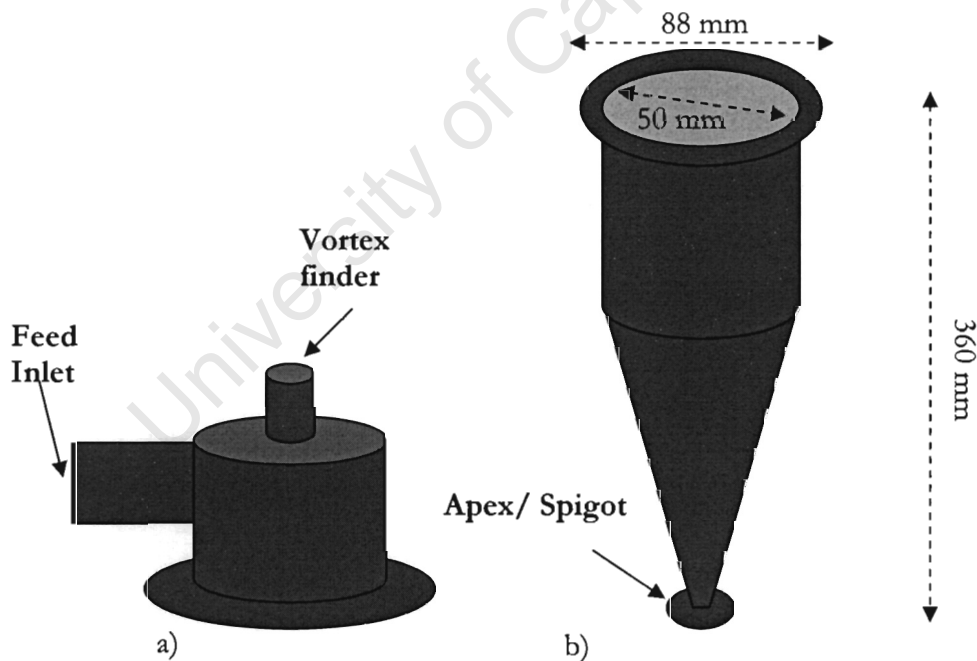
The top and the bottom parts of the hydrocyclone
